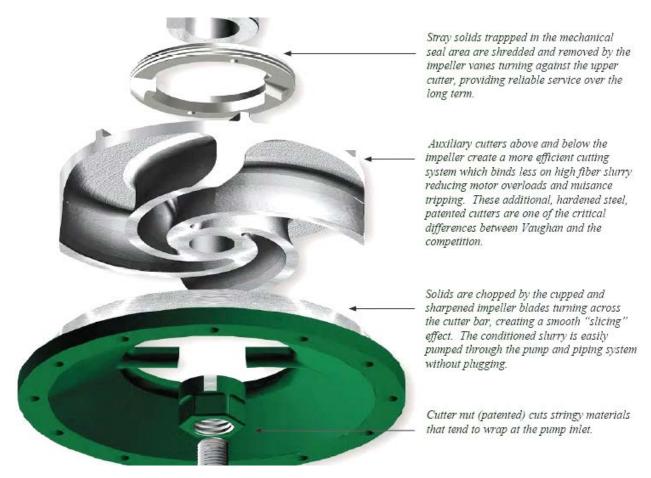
Exploded View of Chopper Pump Impeller Assembly
